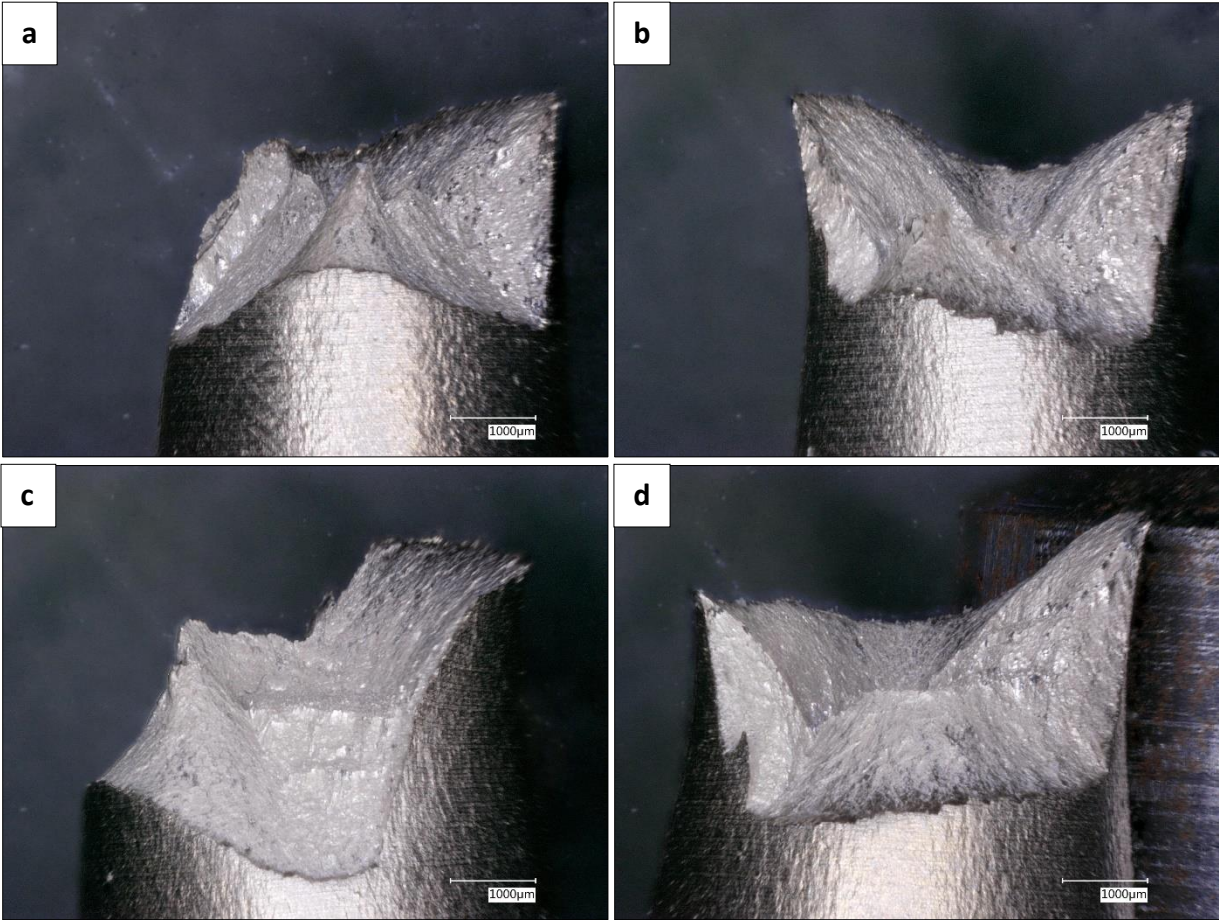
Macroscopic pictures of the fracture area of representative specimens of the block produced at RAMLAB. (a & b) Upper and bottom part of horizontal tensile specimen 3. (c & d) Upper and bottom part of vertical tensile specimen 4.
